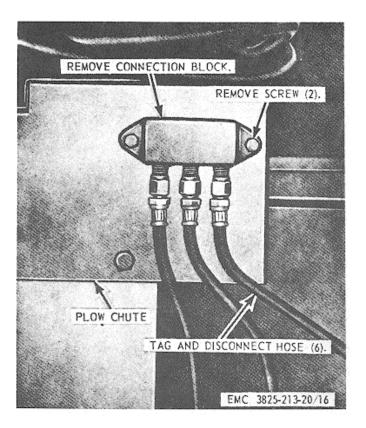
Chute hydraulic connection block assembly, removal and installation.
